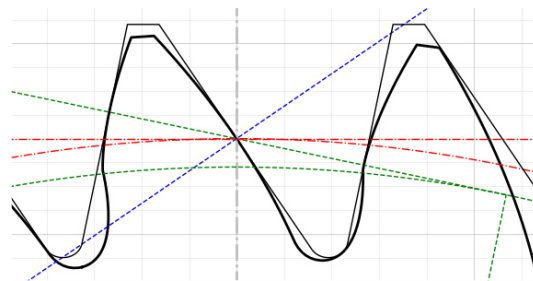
Appearance of the involute gearing with an asymmetric profile.
